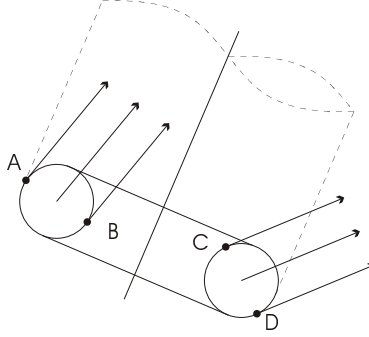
Sectional view of a toroidal cutter showing two pseudo-inserts.
